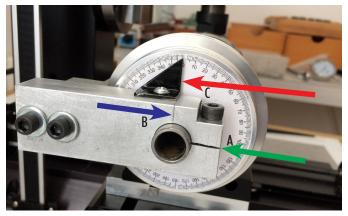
Dimensions for the spindle locking bracket No. 1.
